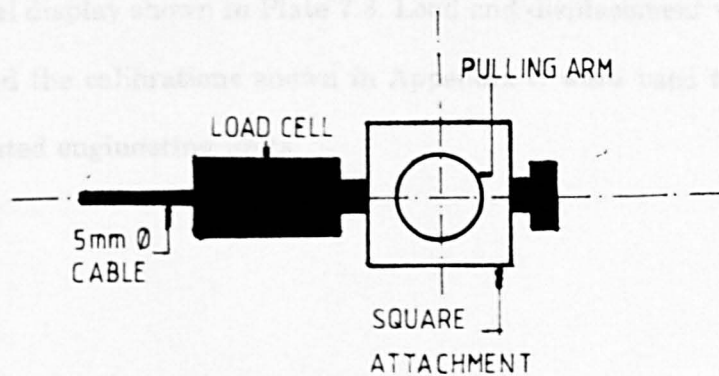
(c) Detail of section 'A' from attachment of pulling cable to pulling arm
